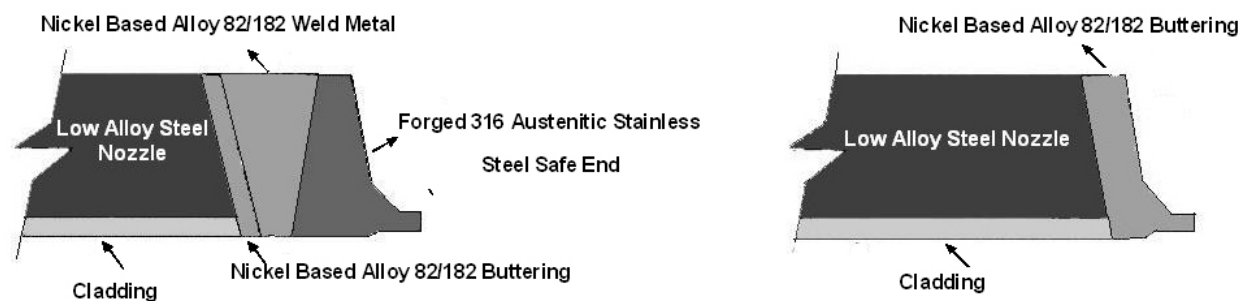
Dissimilar metal weld variations of the Westinghouse plant design, (a) weld with a safe end and (b) weld without a safe end (Miteva & Taylor, 2006).
